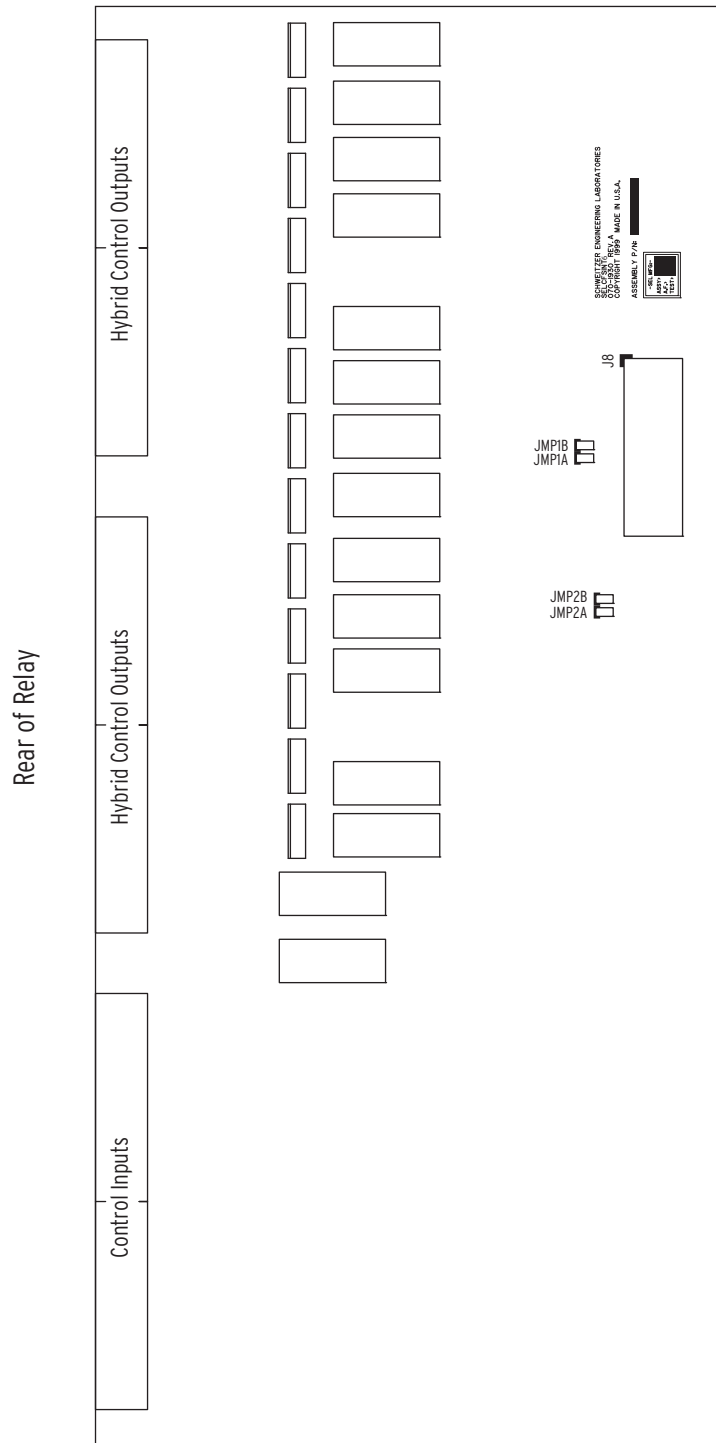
Major Component Locations on the SEL-421 INT6 (or INT7) I/O Board
